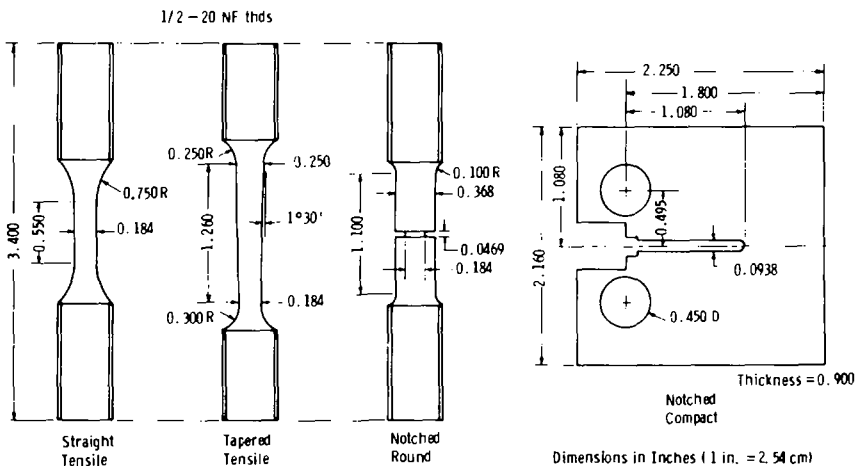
Smooth and notched stress-corrosion crack initiation specimens.
